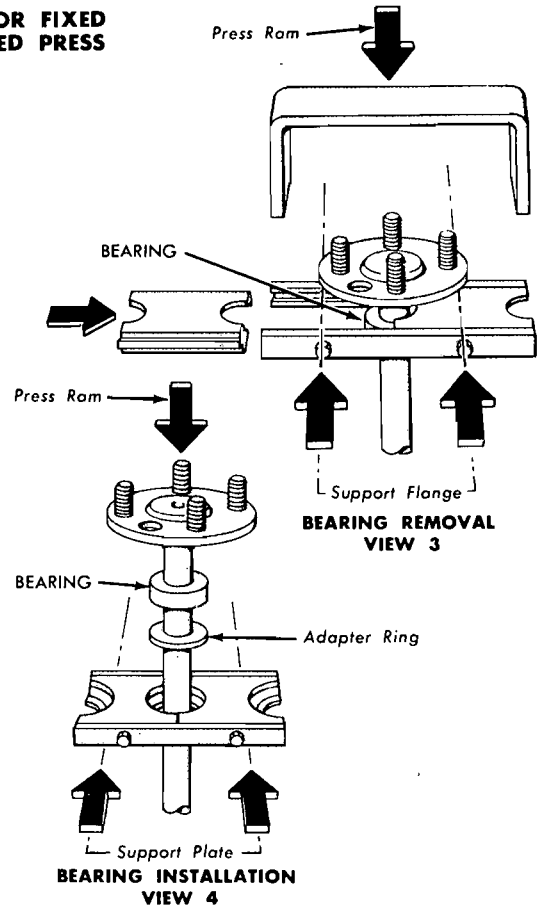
Removing and Installing Rear Wheel Bearing—Comet
